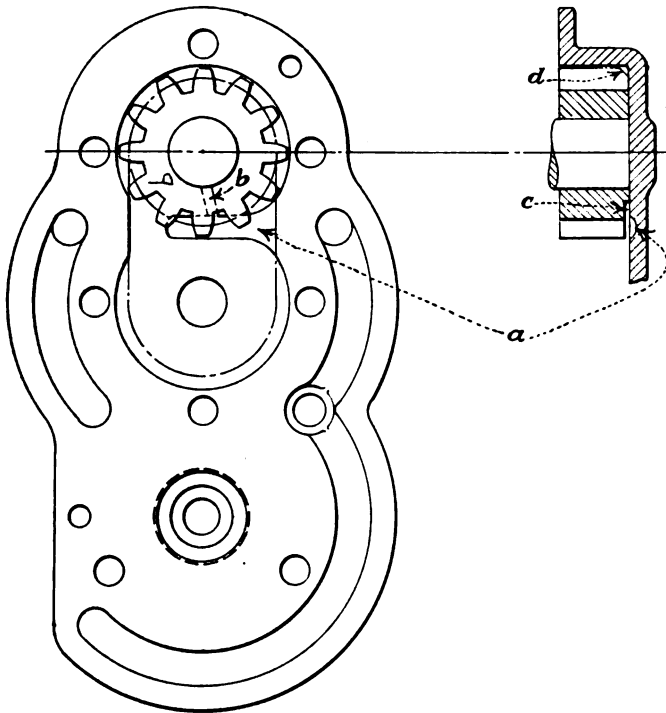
THE GEAR-PUMP THAT CIRCULATES THE LUBRICATING OIL IN THE PACKARD ENGINE
